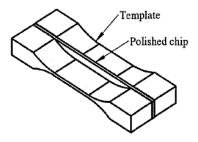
Mounting the polished specimen (chip) between the templates for producing dog-bone shaped micro-specimen through polishing.
